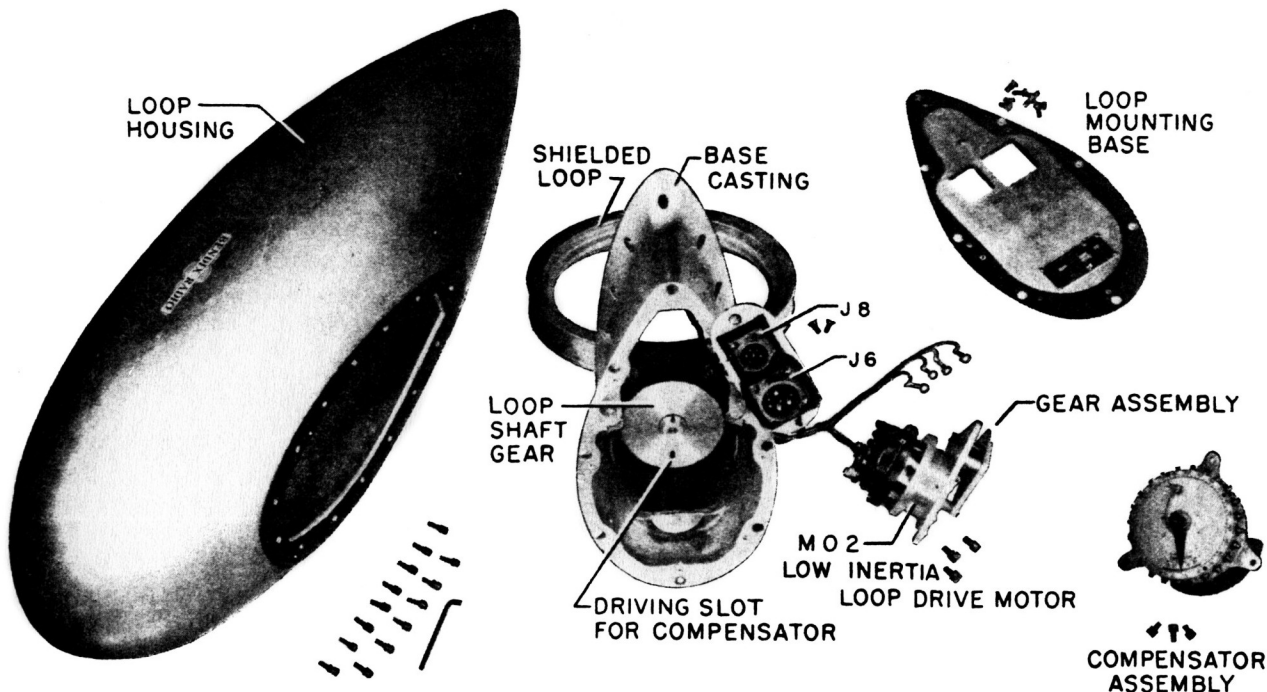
TYPE MN-36A AUTOMATIC LOOP, EXPLODED VIEW
